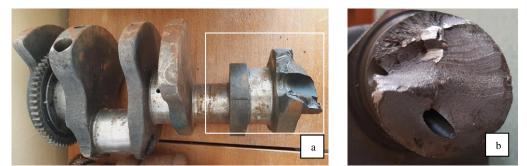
Fatigue failure of crankshafts: a) destruction of a cast iron crankshaft from a truck; b) destruction of a steel crankshaft by a car.
